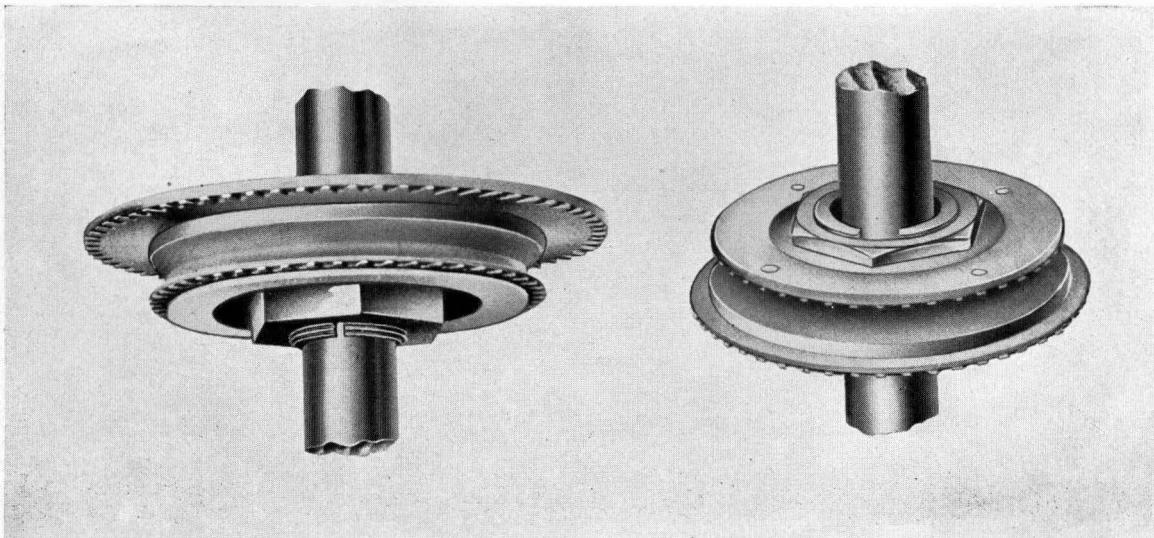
Two driving gears are required for group selectors and final selectors. One gear drives the brush carriage and the other controls the position of the trip spindle.
